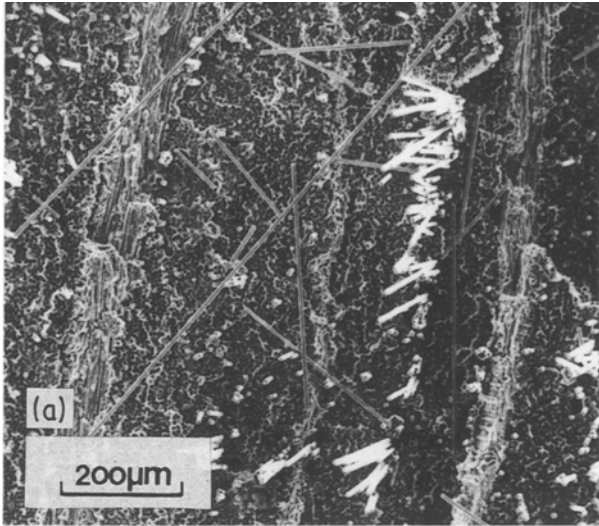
Tensile tested longitudinal specimen; fracture surface showing (a) flat surface (b) close fibre packing, SEM.
